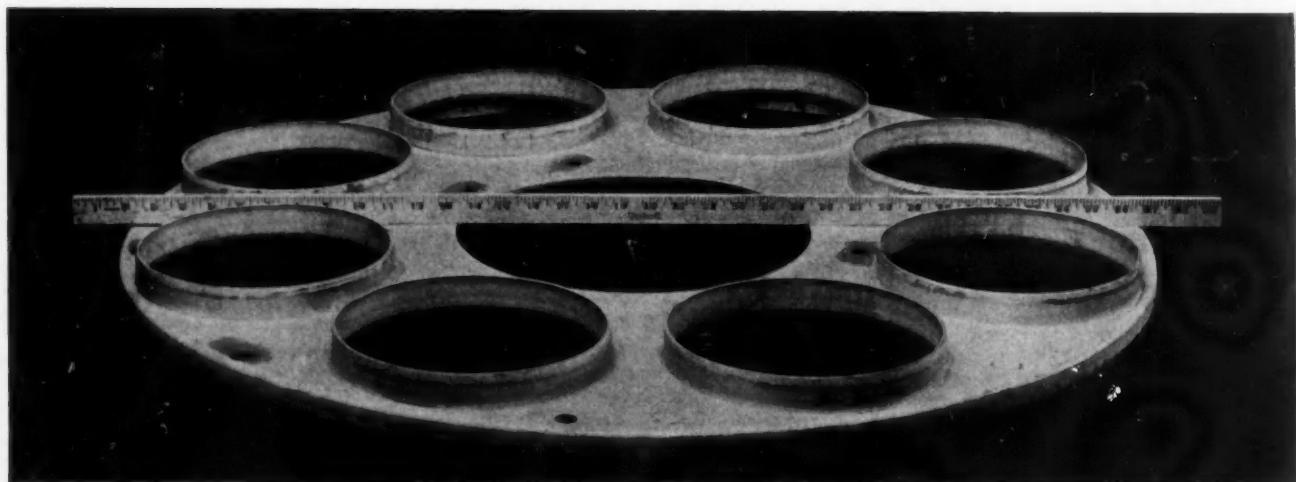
This burner support plate for the General Electric J-47 turbojet engine, made of stainless steel, is a challenging stamping problem. It calls for a 40% elongation of the material
